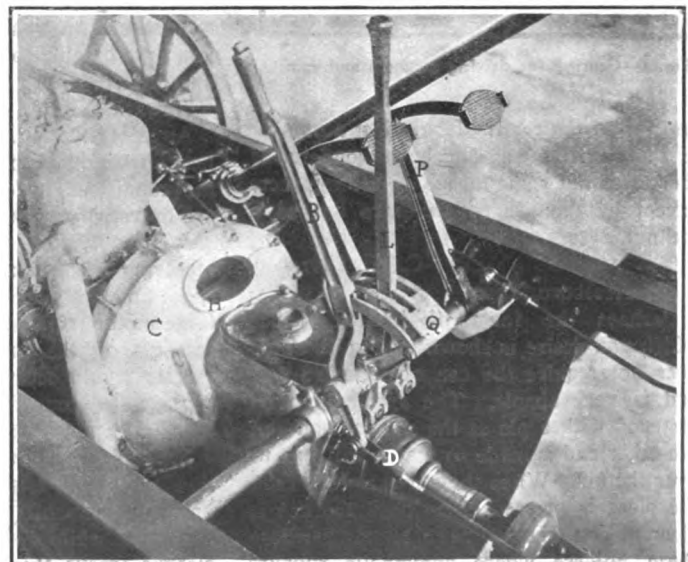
View of flywheel and clutch housing. Note control levers in center
